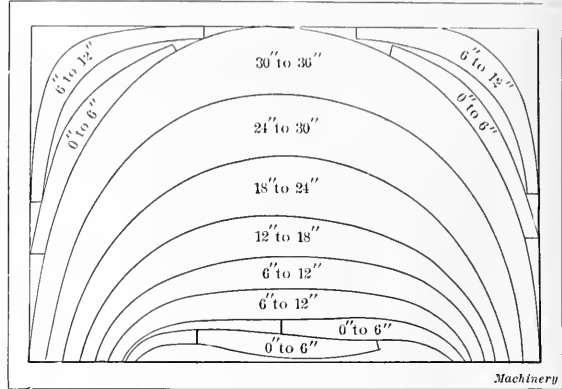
Method of cutting up a Sheet of Aluminum for a Set of Micrometer Frames
